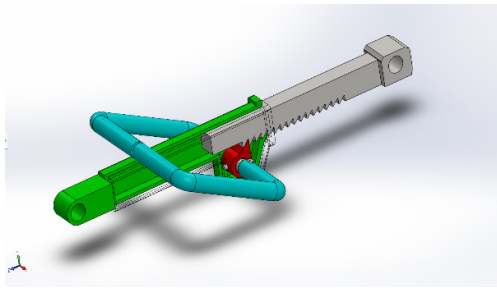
Assembled view of automatic reverse locking rack mechanism
